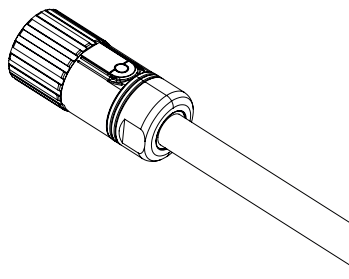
Motor cable for linear table HT150L, HT200L, HT250L, HB250L
